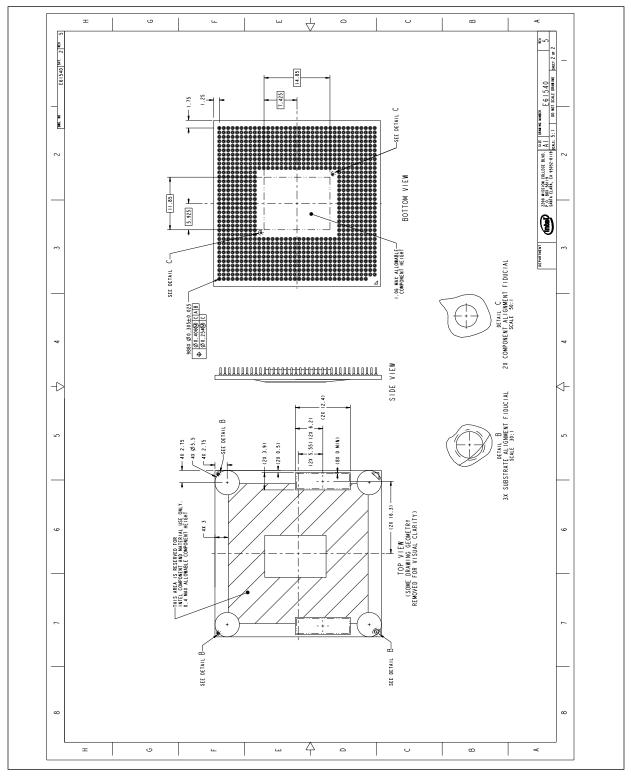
Processor BGA1023 2C (GT1) Mechanical Package (Sheet 1 of 2)
